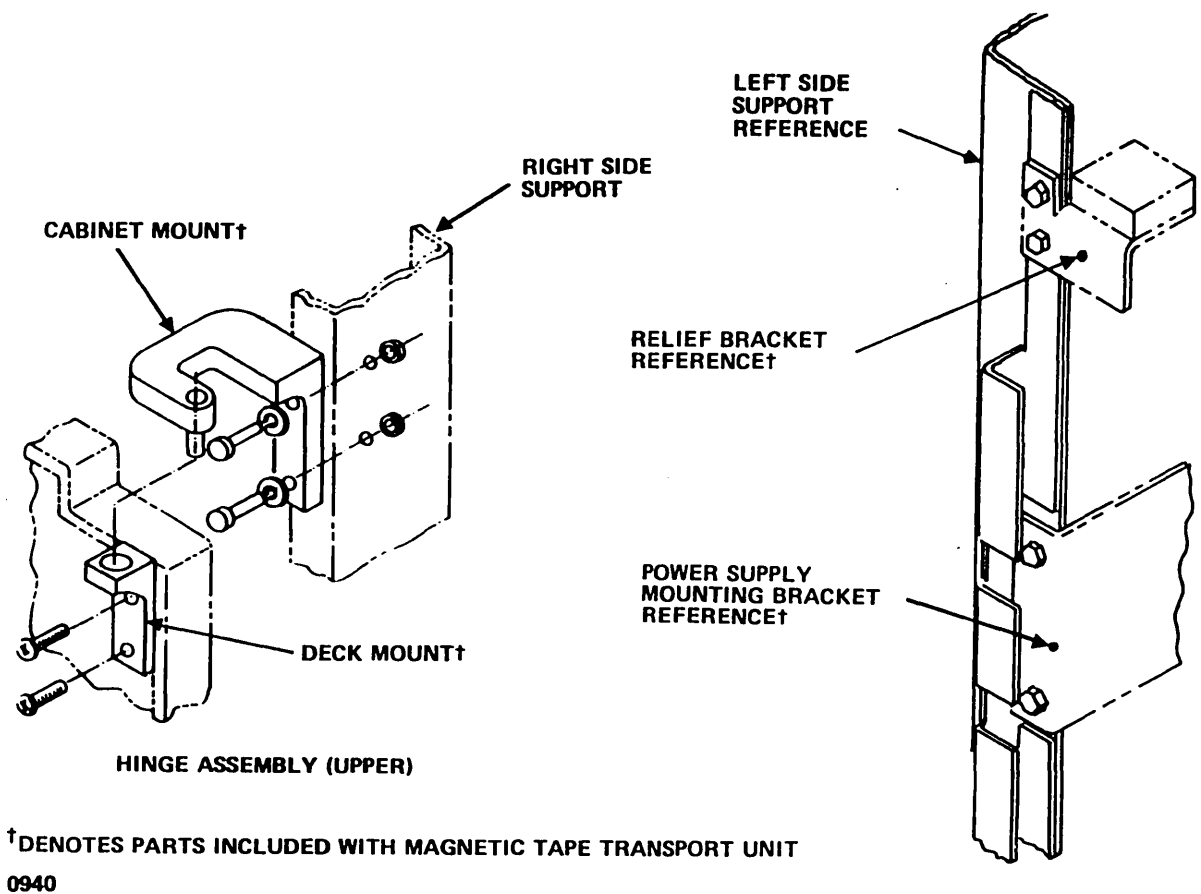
Power Supply Hinge Assembly and Relief Bracket Attachment
